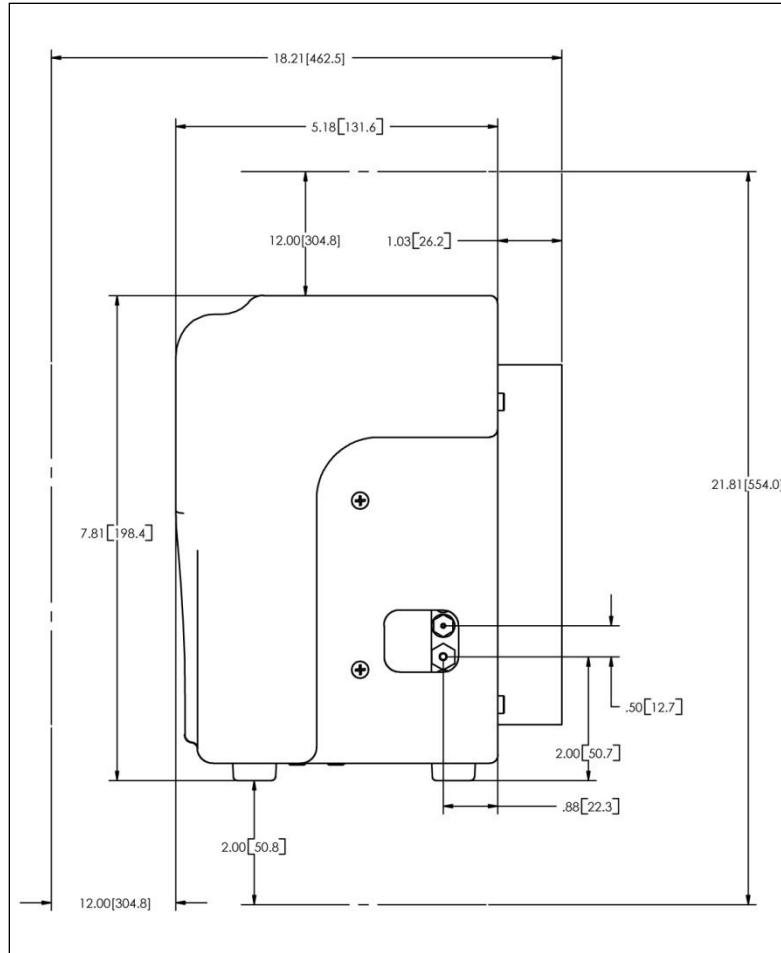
Sensor Dimensions and Required Clearances, Right Side View
